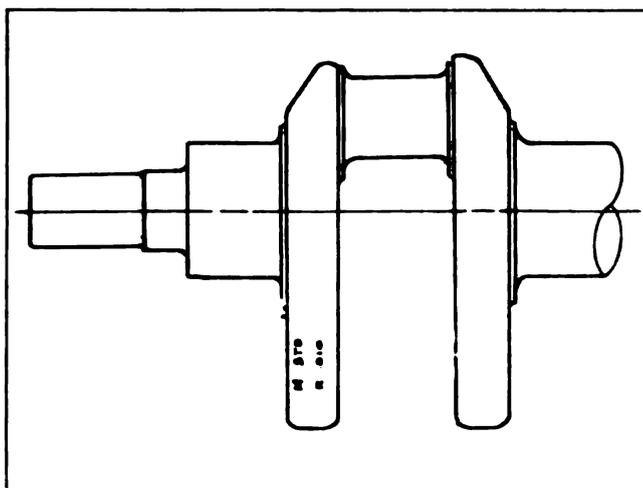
(V50138). Marks To Show The Size Of The Main And Connecting Rod Journals.
